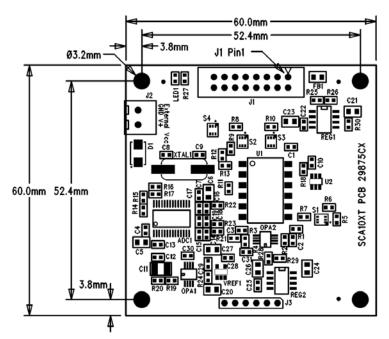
TOP view assembly drawing for SCA10xx PCB (aspect ratio not 1:1).
